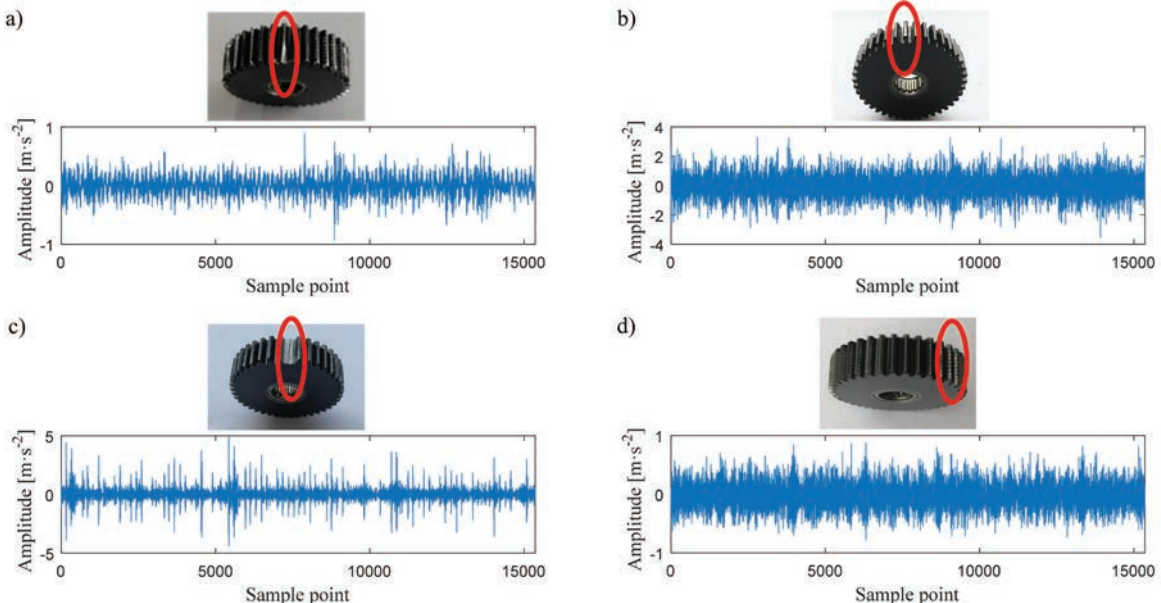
Examples for typical fault and corresponding signal in typical fault states of planetary gearbox for a) broken tooth b) crack c) missing tooth, and d) wear of tooth surface
